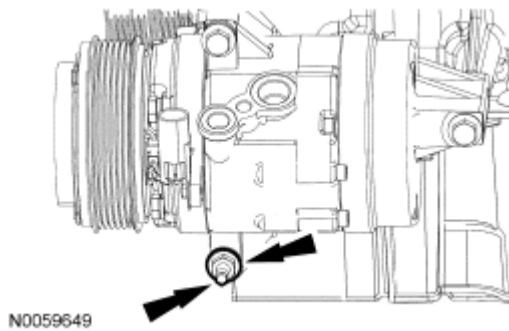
Locating A/C Compressor Mounting Stud & Nut
